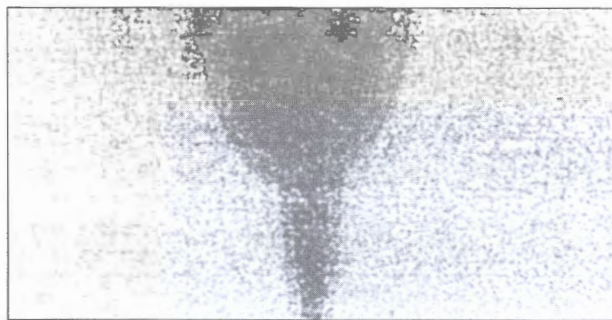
Macrosection of a combined laser + submerged-arc weld ($d = 20$ mm)
